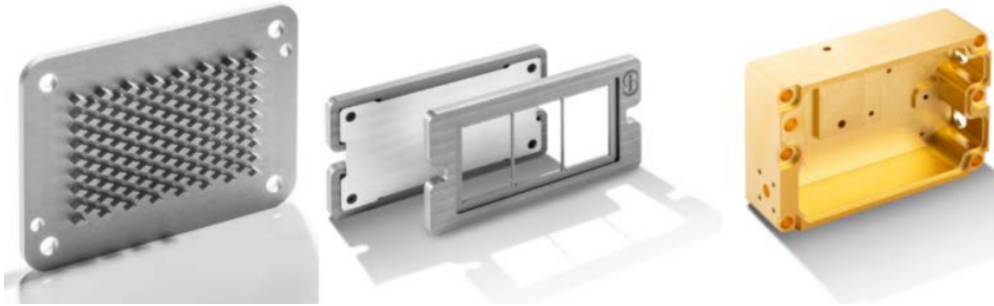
ALG customized parts with complex geometries: base plates and coolers for power modules (left), heat sinks and housings for laser diodes (right).
